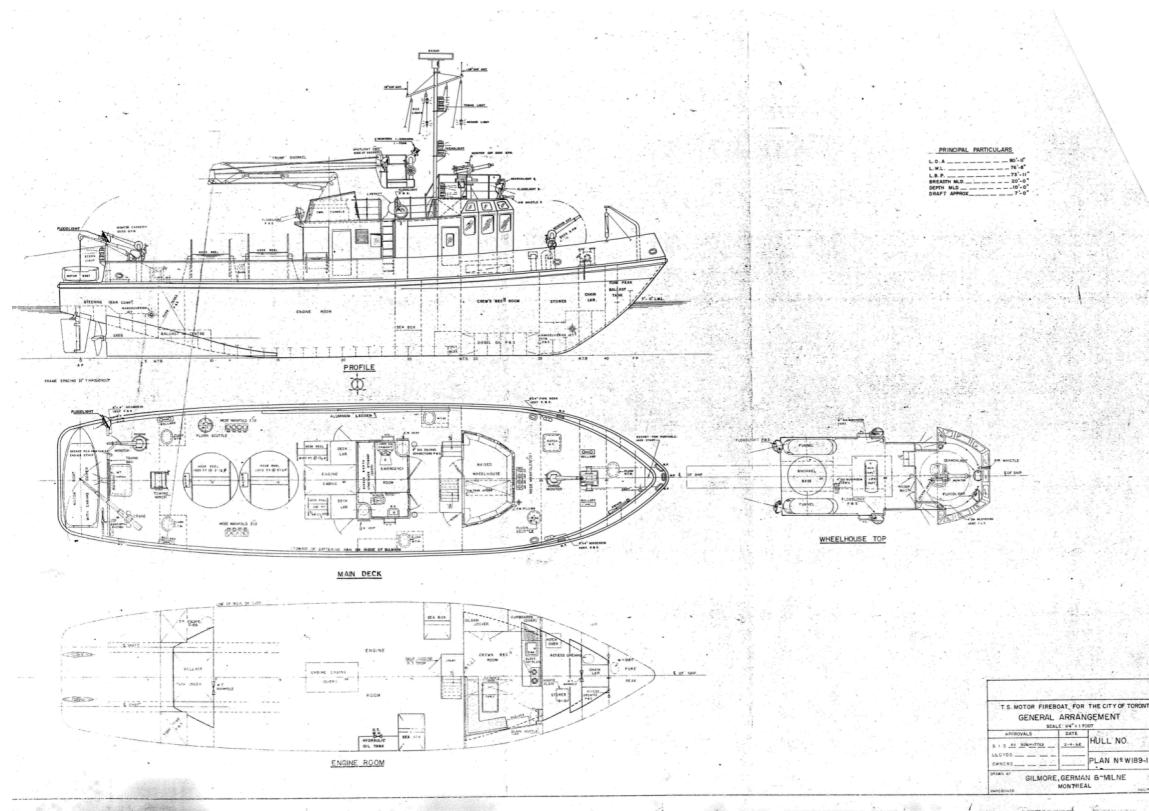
WM Lyon Mackenzie Deck Plan [3]
